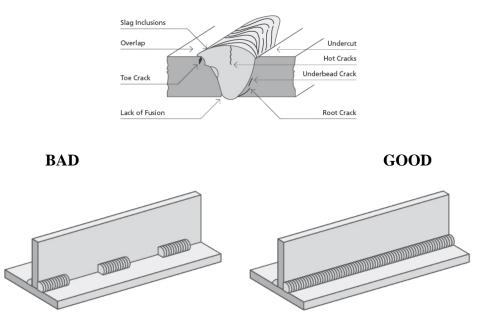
Defects which form weld crevices<sup>12</sup>
